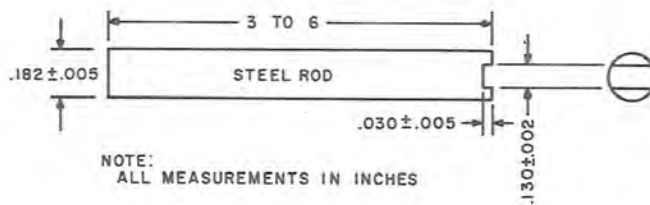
RF Coil Drive Shaft Wrench Fabrication Diagram.
